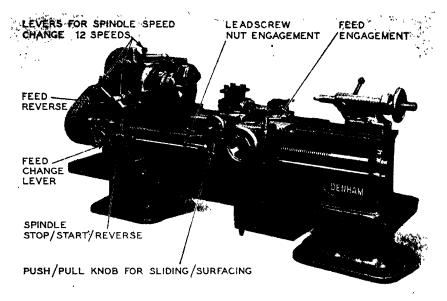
A 63-in. Centre lathe 1111ed with a standard 3-change gearbox and taper turning attachment (Denham's Engineering Co., Ltd.)
